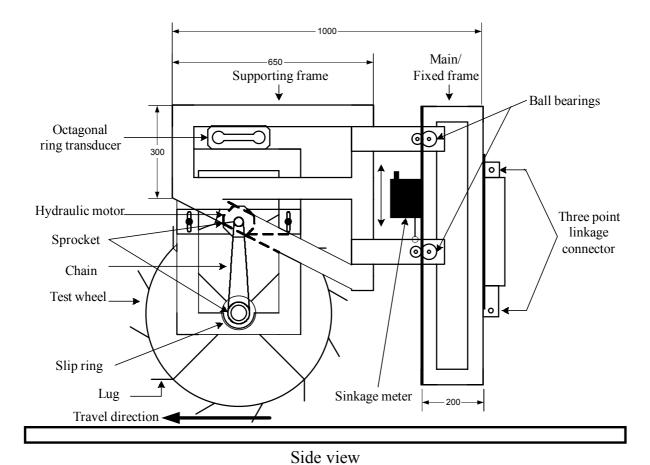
Sketch of cage wheel test setup with free sinkage system
